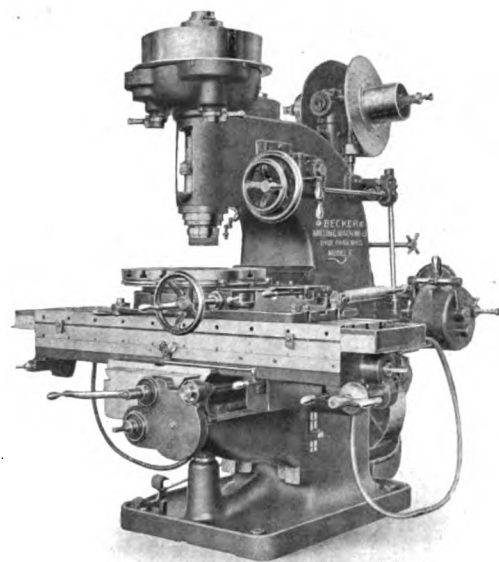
Model "C" Vertical Milling Machine with Rotating Table
